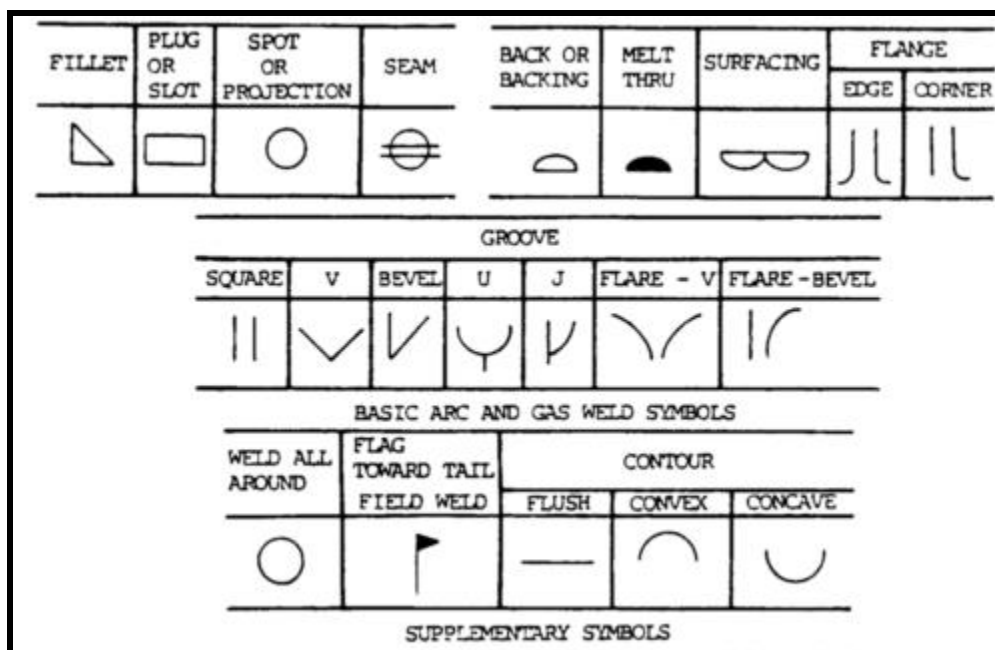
Basic & Supplementary arc and gas weld symbols.
